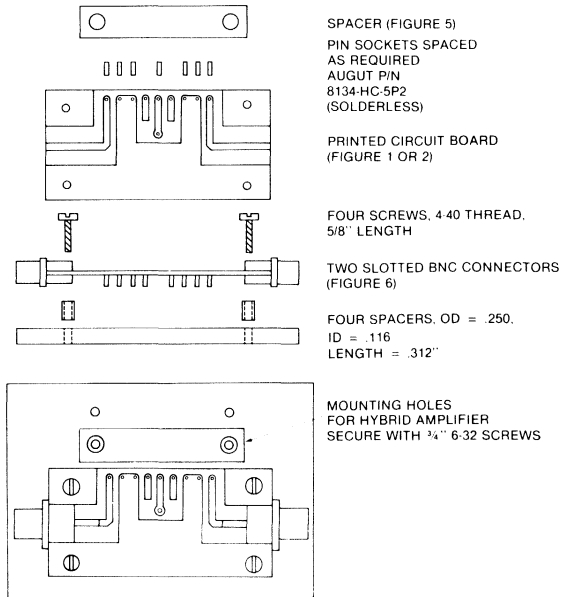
TEST FIXTURE ASSEMBLY FOR TRW
